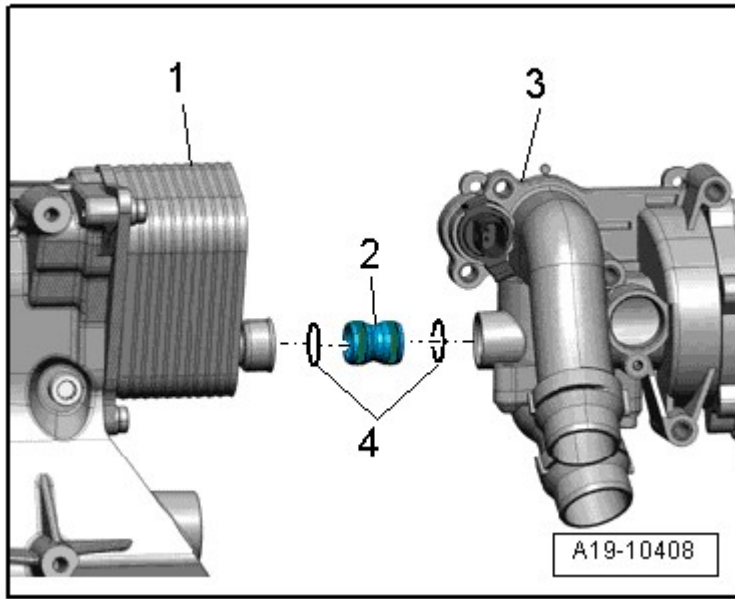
Identifying Accessory Assembly Bracket, Coolant Pump Housing, Connection And O-Rings
